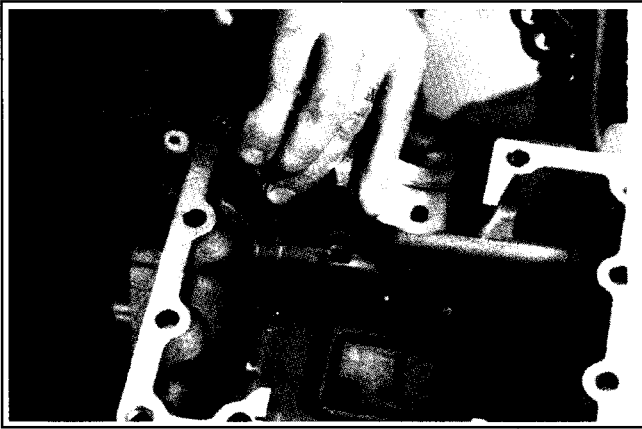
Installing Oil Pressure Relief Roll Pin.
